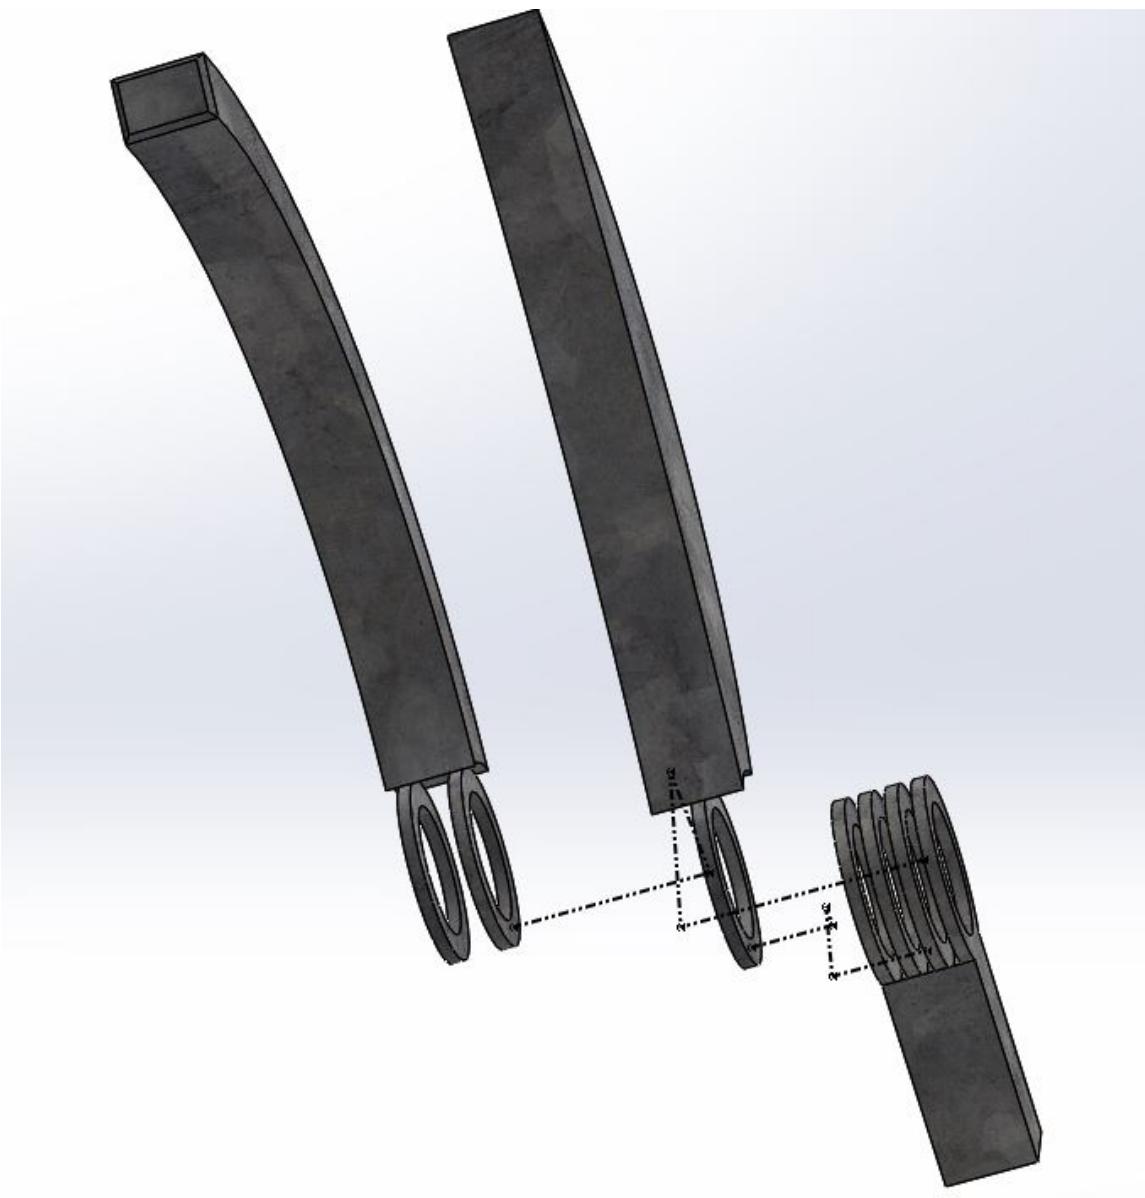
Sackett, Justin: Assembly Step 3
